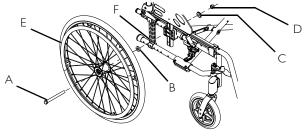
FIGURE I Removing/Installing Rear Wheels - Permanent Axles
